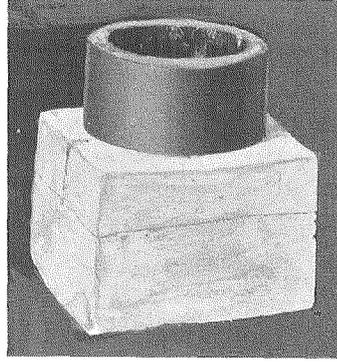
Swaging Ring Placed Ready for Casting the Die
